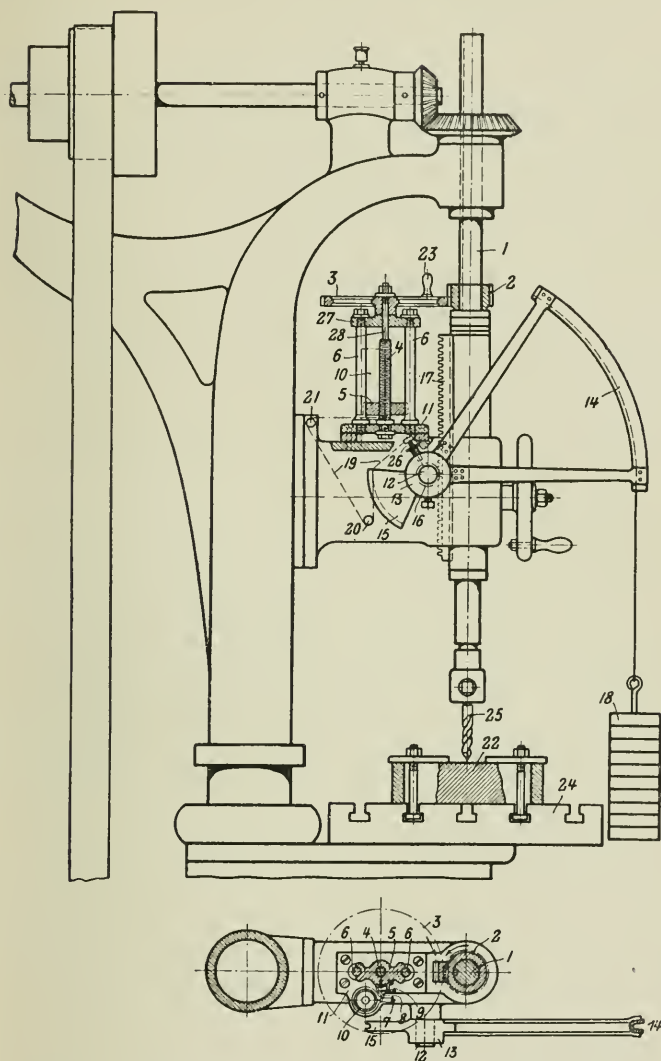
Hardness Drilling Machine. Pattern I. (Kessner Type.)
